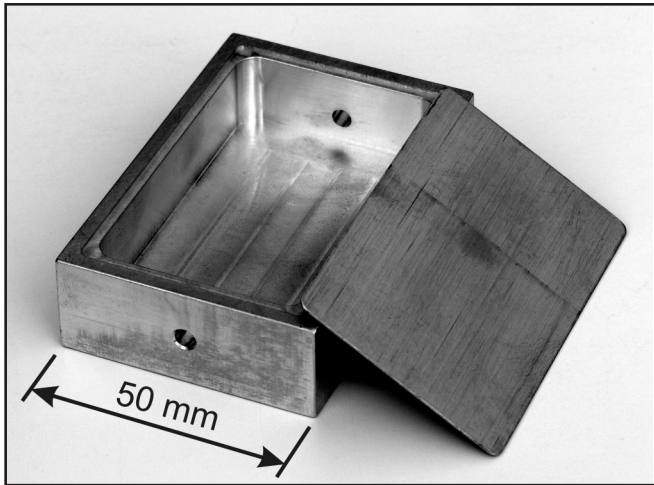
Example of an electronic package consisting of a 6061-T6 aluminum machined box and 4047 aluminum sheet lid.
